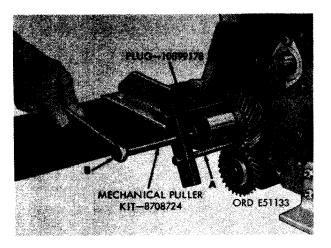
REMOVING CRANKSHAFT GEAR USING MECHANICAL PULLER KIT - 8708724.
